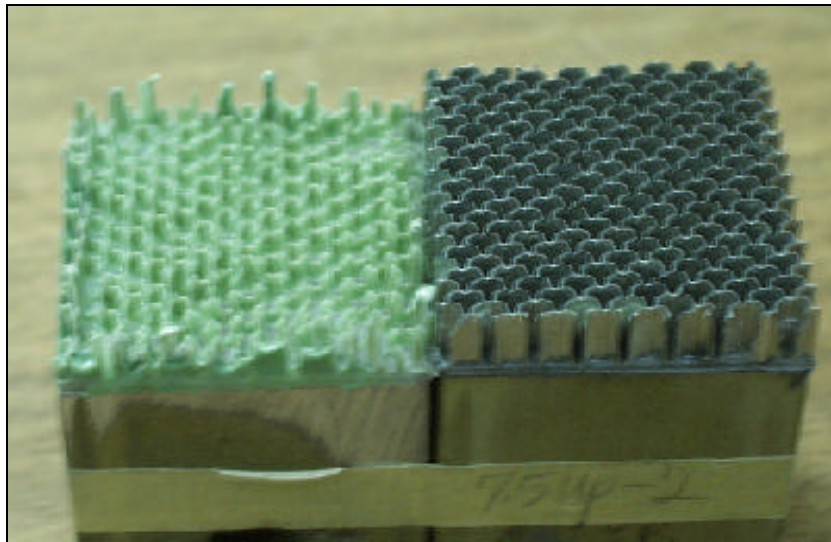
Photograph of Tested 7.5 Degrees Facesheet Specimen
